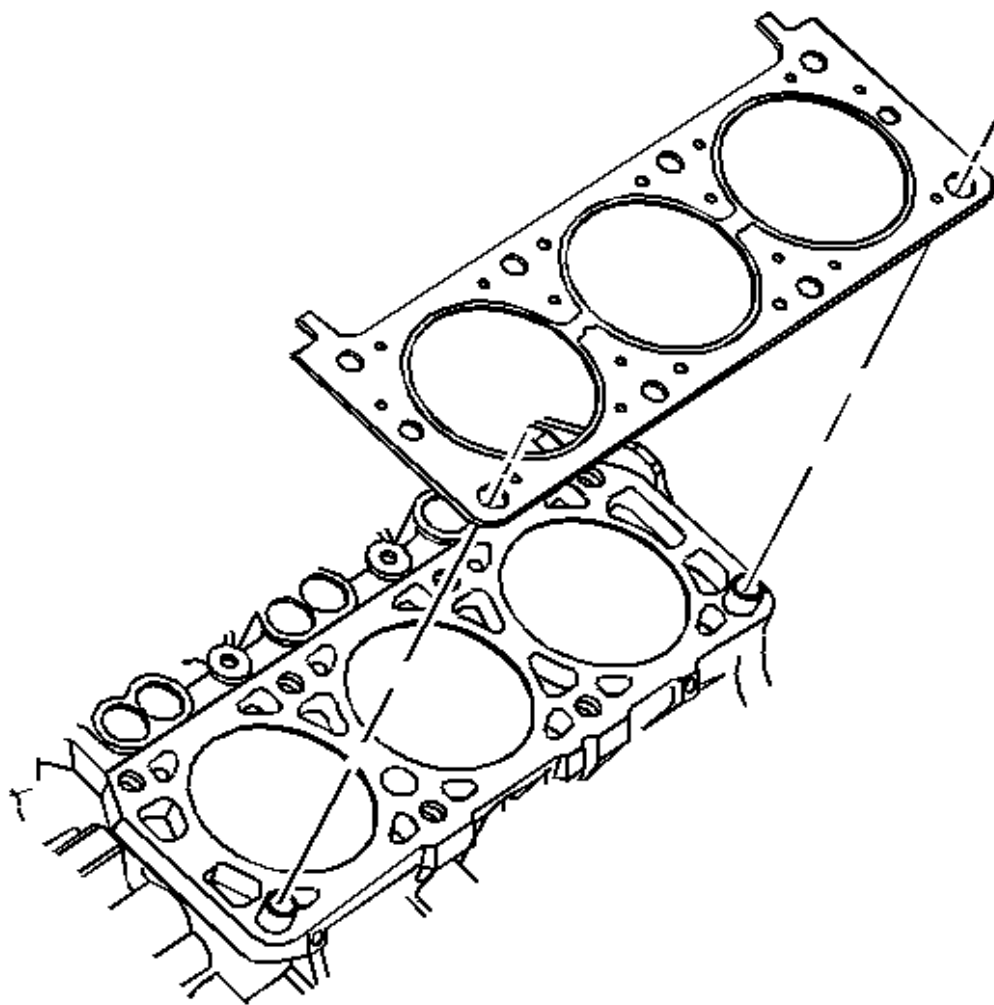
View Of Cylinder Head Gasket And Alignment Pins
